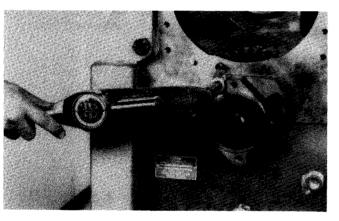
Tighten bearing cap bolts to specified torque. (See torque chart.)
